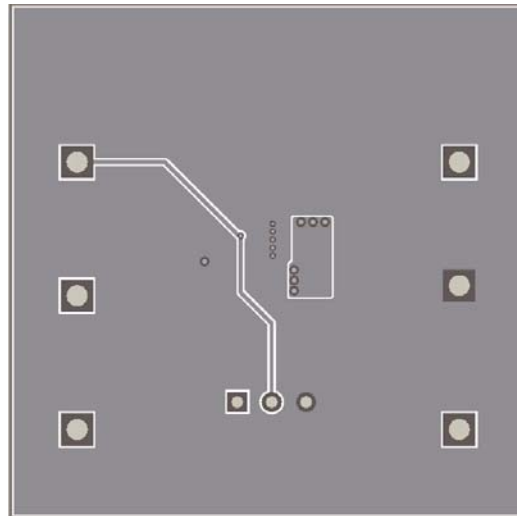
AAT4631/AAT4631-1 Evaluation Board PCB Bottom Side.
